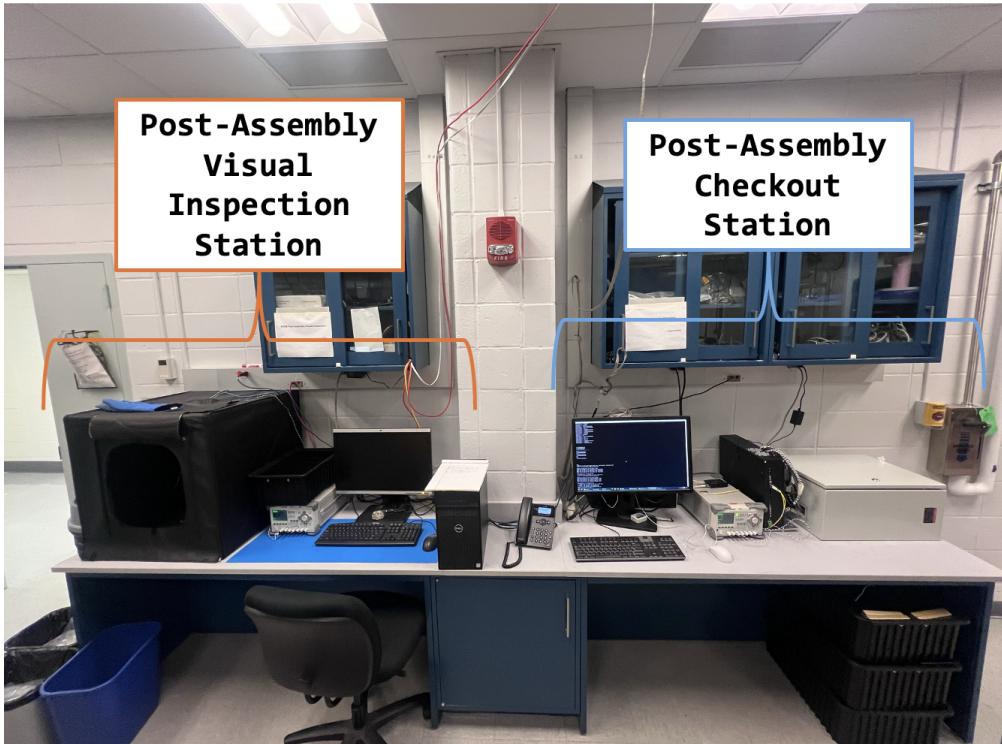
FEMB Post-Assembly Visual Inspection and Checkout stations located in room 1-216.
